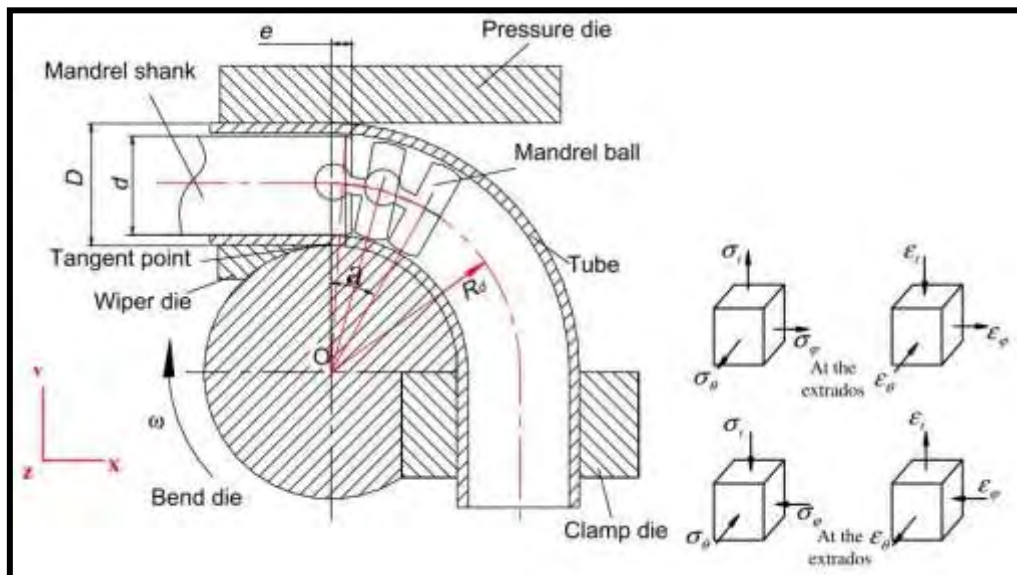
Geometry model for thin-walled tube rotary draw bending process
